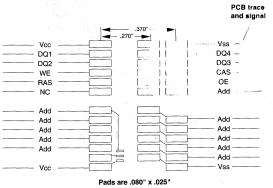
PCB LAYOUT FOR A 4 MEG x 4 SOJ
